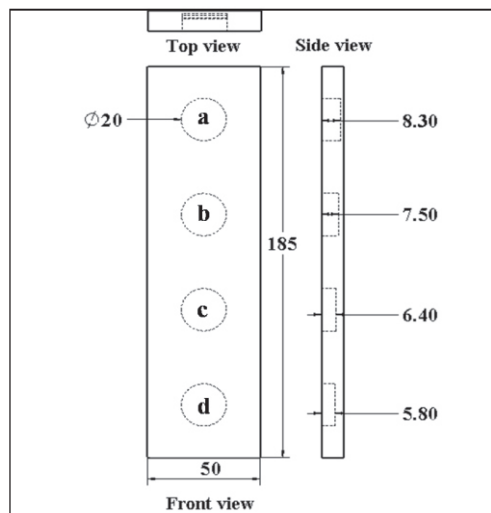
Layout of the experimental mild steel sample with 4 flat bottom holes. (All the dimensions are in mm and depths represented from the bottom)
